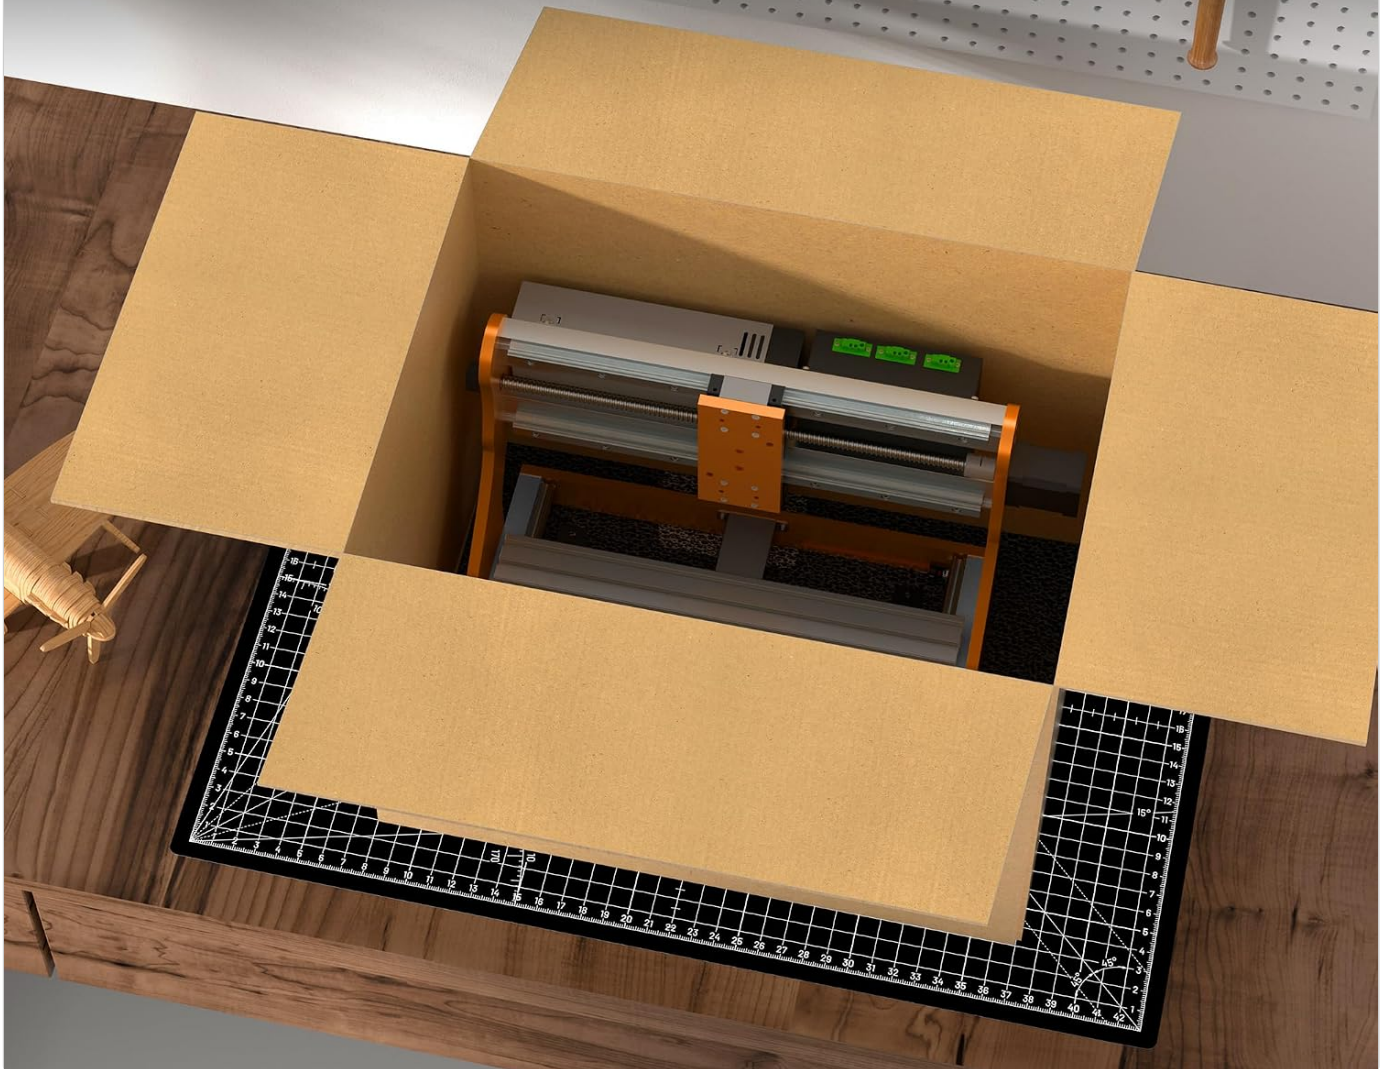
The LUNYEE 3020 Nova CNC machine is 90% pre-assembled, simplifying initial setup.
